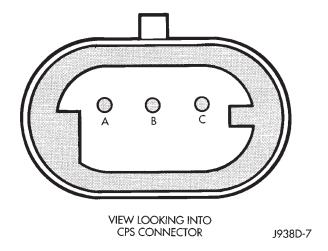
Crankshaft Position Sensor Connector CRANKSHAFT POSITION SENSOR—5.2L ENGINES
